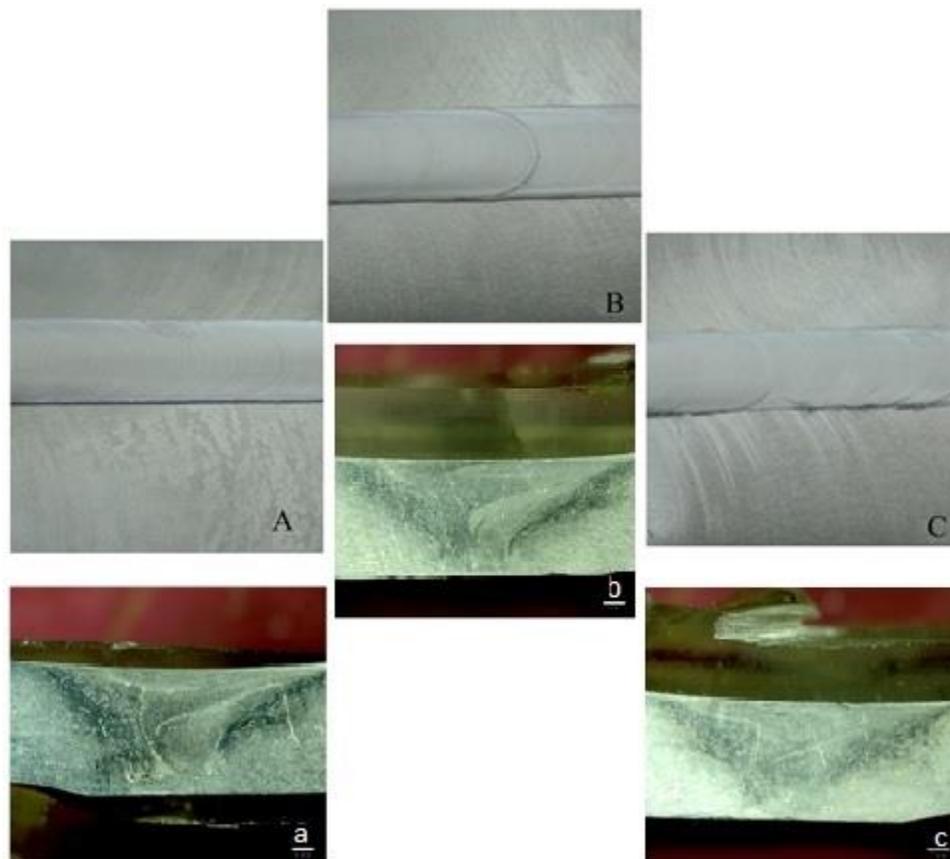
Weld surface and the cross-section in different conditions of welding (a) room temp (b) 75 °C (c) 125 °C
